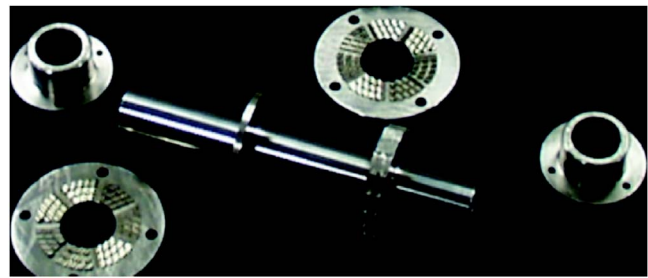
Test shaft, journal foil bearings, and partially assembled thrust foil bearings
